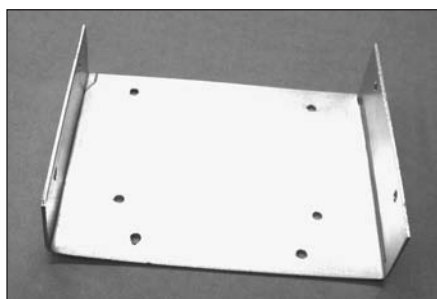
Fan supply and temperature sensor circuit mounting bracket.
